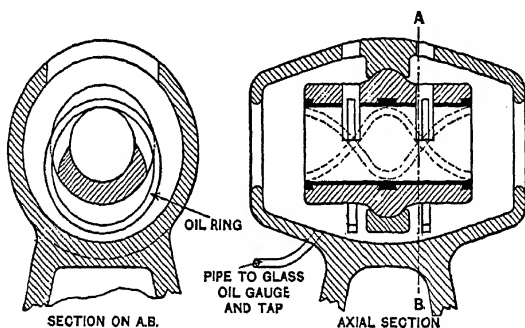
SELF-OILING BEARING WITH SPHERICAL SEAT.
